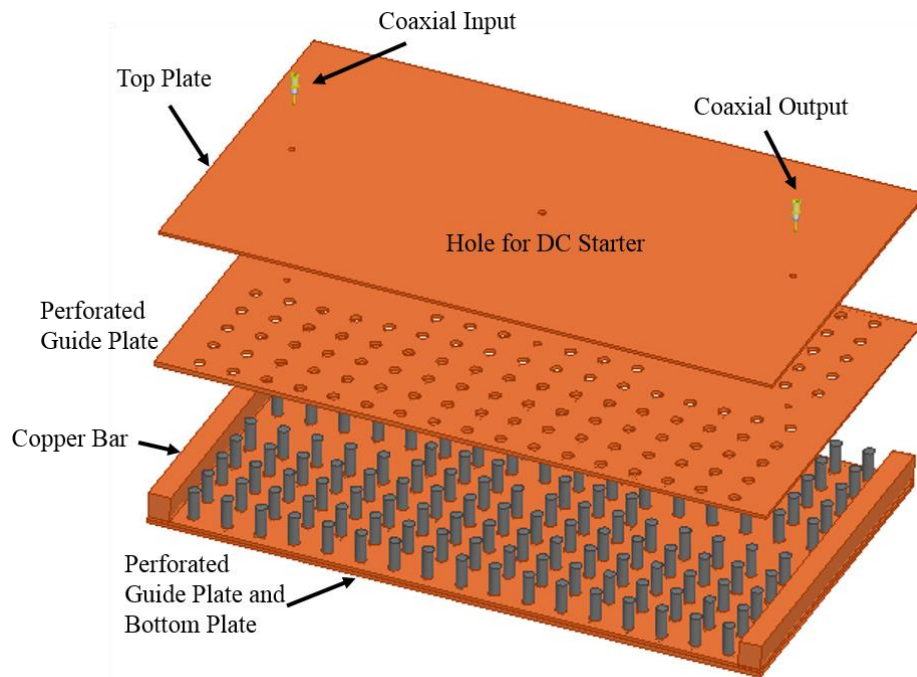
Final design of the PhC device including perforated guide plates, solid plates, coaxial input and outputs. Partially exploded view for clarity.
